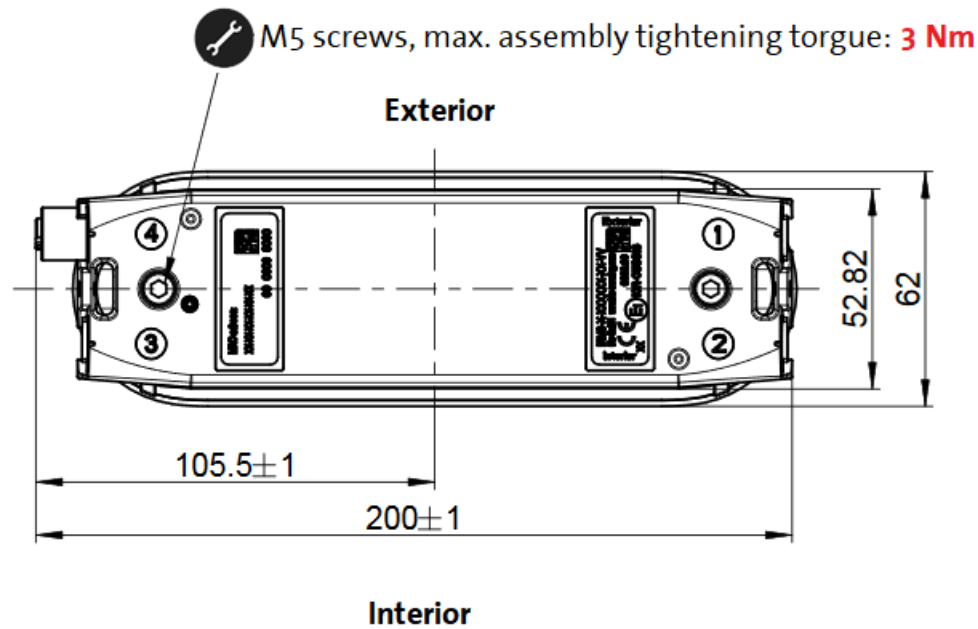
Dimensions – Bottom view IRMA6-SENSOR-HD-00-POE-00-R
